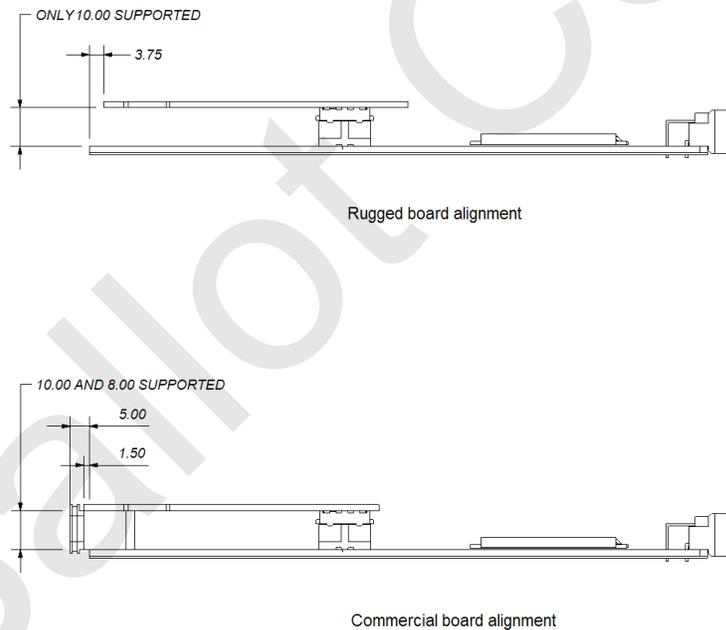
FMC Mezzanine Module to Carrier Card dimensions
